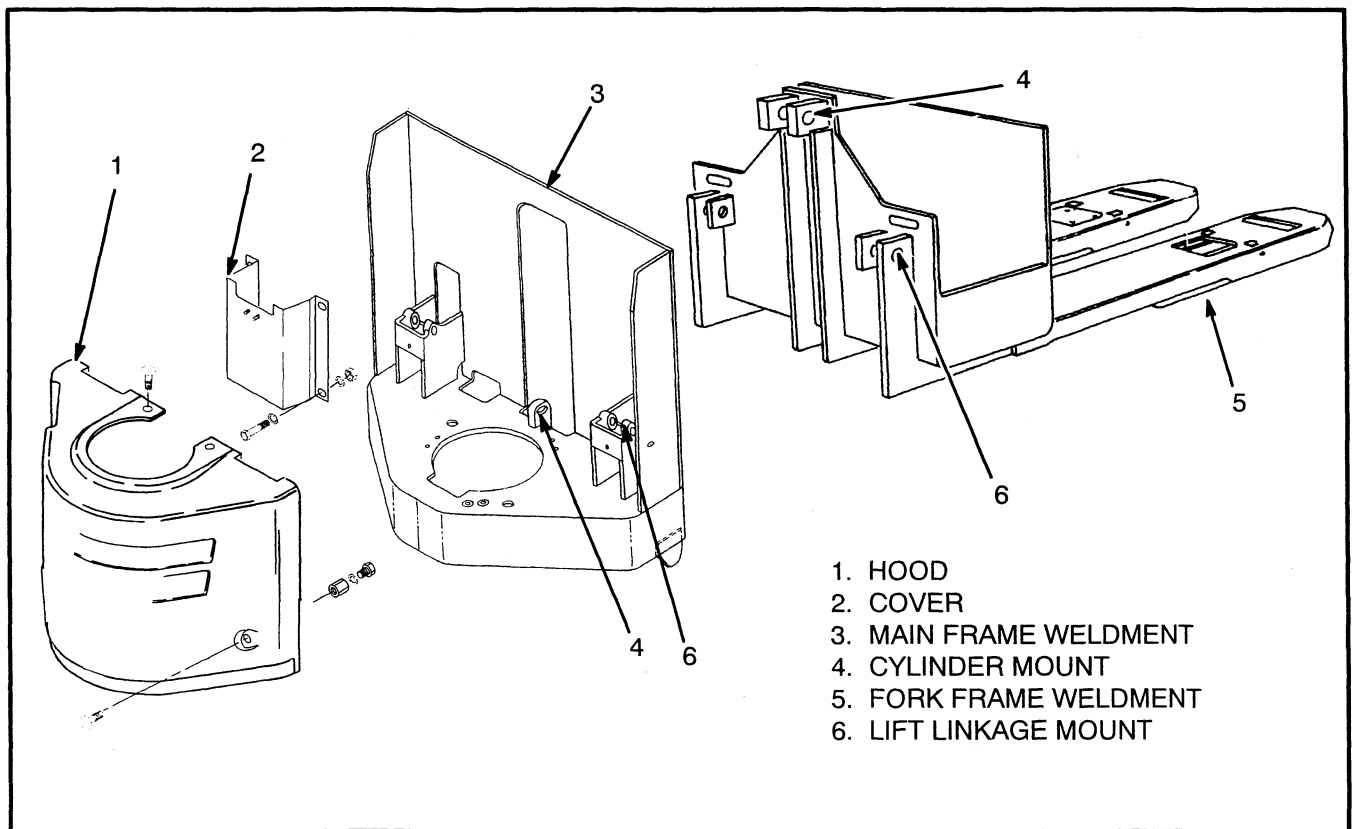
FRAME WELDMENT - W60-80XT
